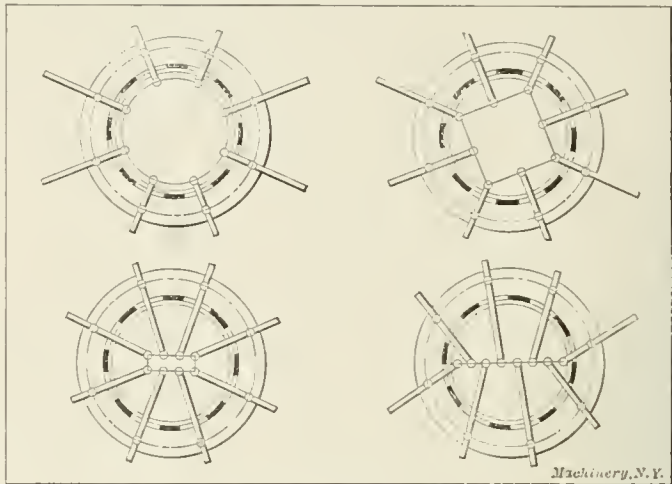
Diagrammatic View showing a Few of the Layouts to which the Spindles may be set
